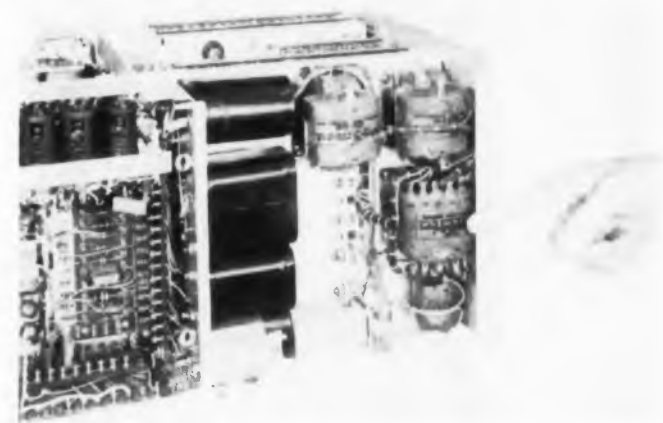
Expensive testing to MIL specs was avoided after investigation showed these units had performed to specs in other equipment.
